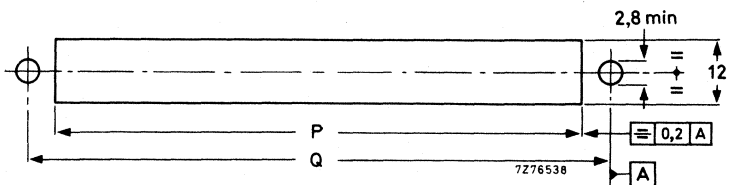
Panel cut-out for the male part; see Table 4 for dimensions P and Q.
